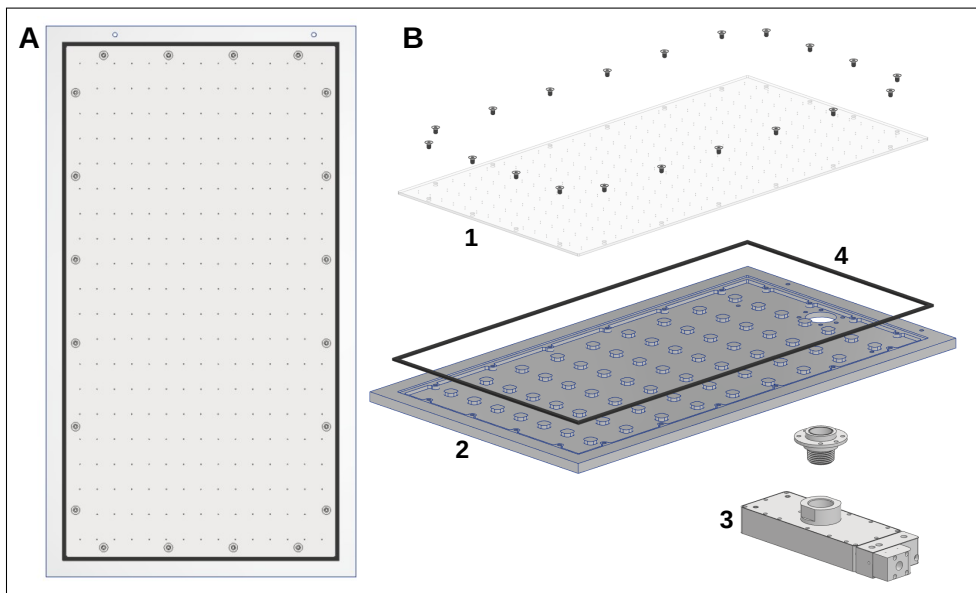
Vacuum Plate for Medium Foam Pads: - A) Top View - B) Exploded View, including 1) Plexiglass plate with small holes, 2) Aluminum base, 3) Multistage Venturi ejector, 4) Flexible and airtight contour
